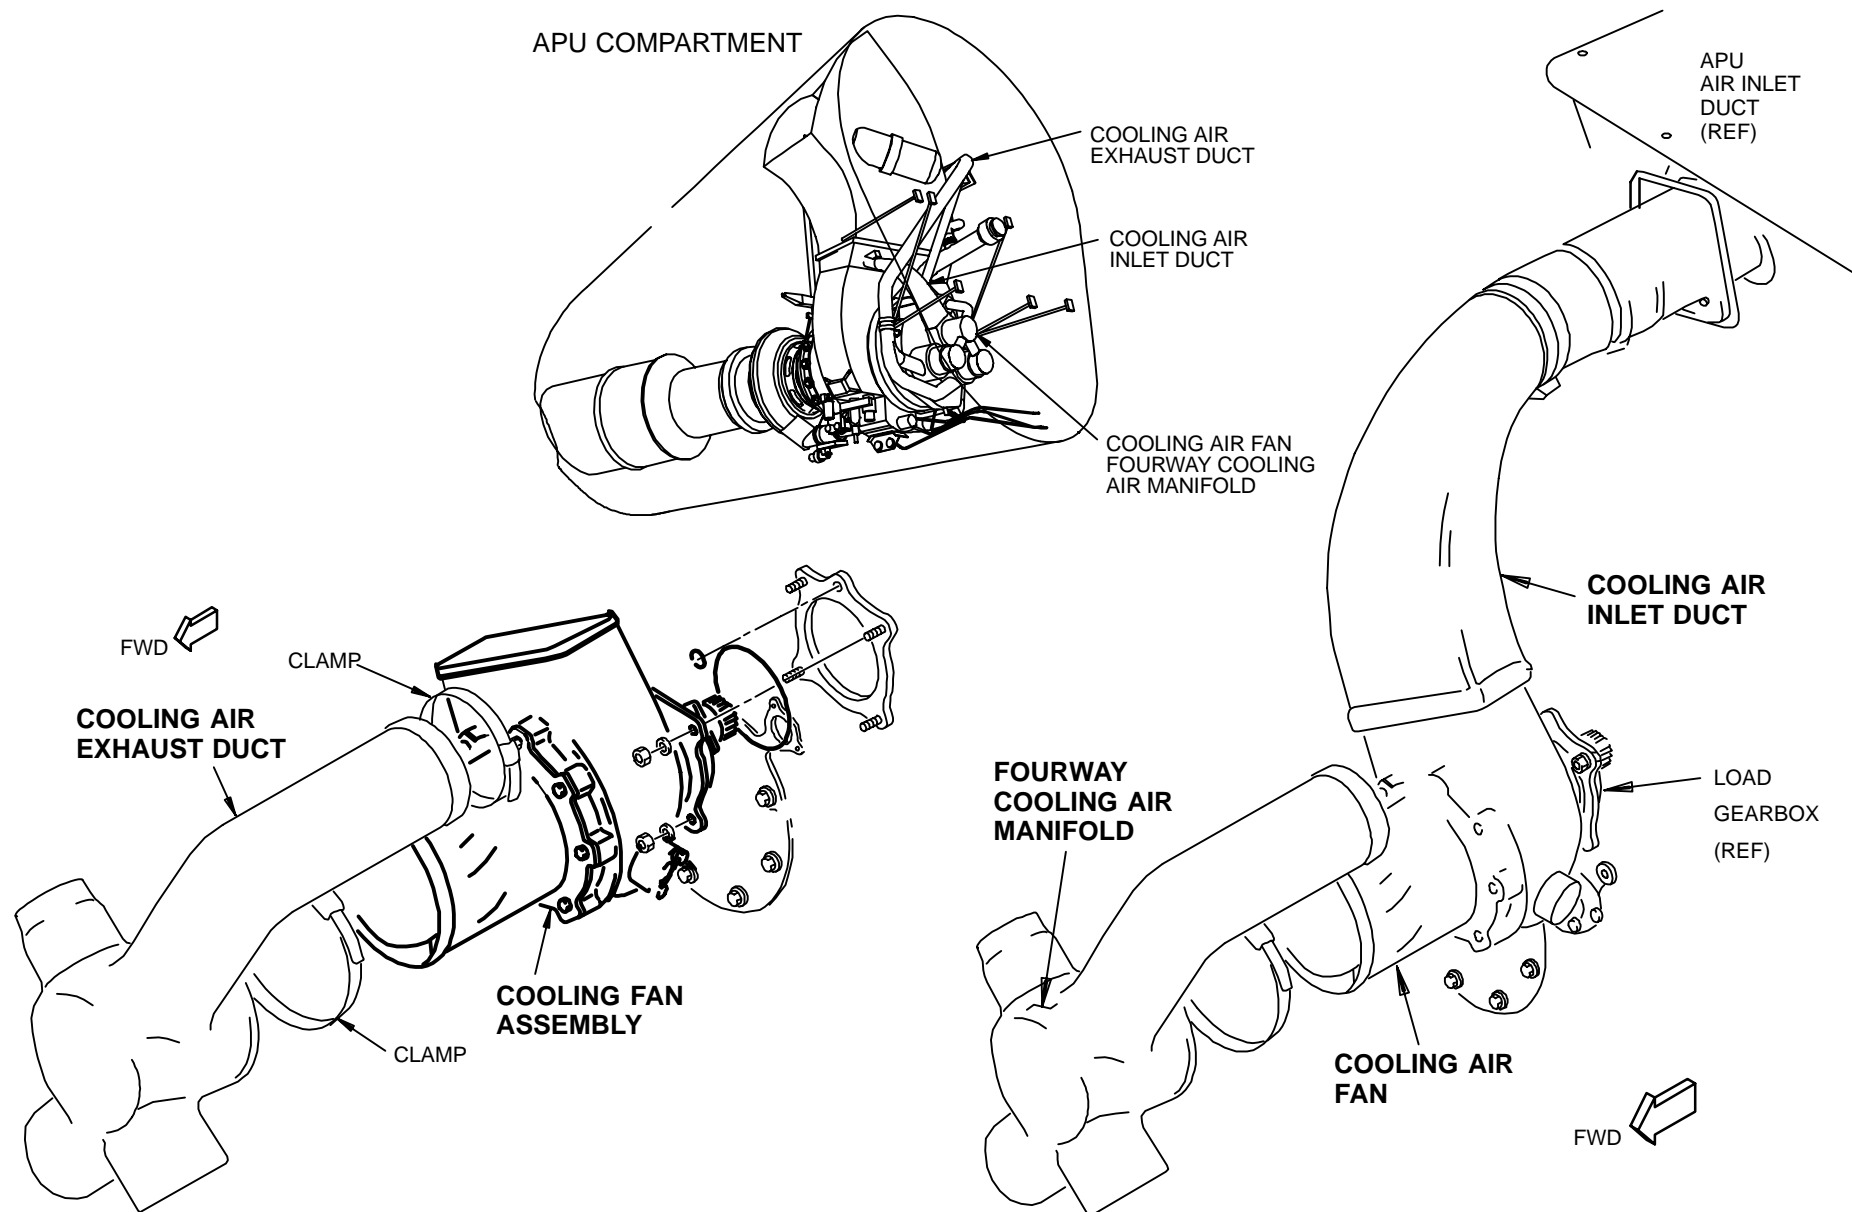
COOLING FAN, INLET- AND EXHAUST DUCT
